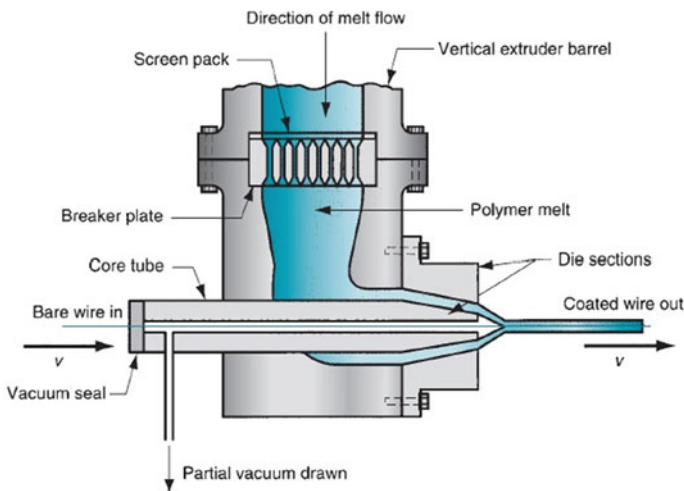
Side view cross section of die for coating of electrical wire by extrusion. Reused from [11]
